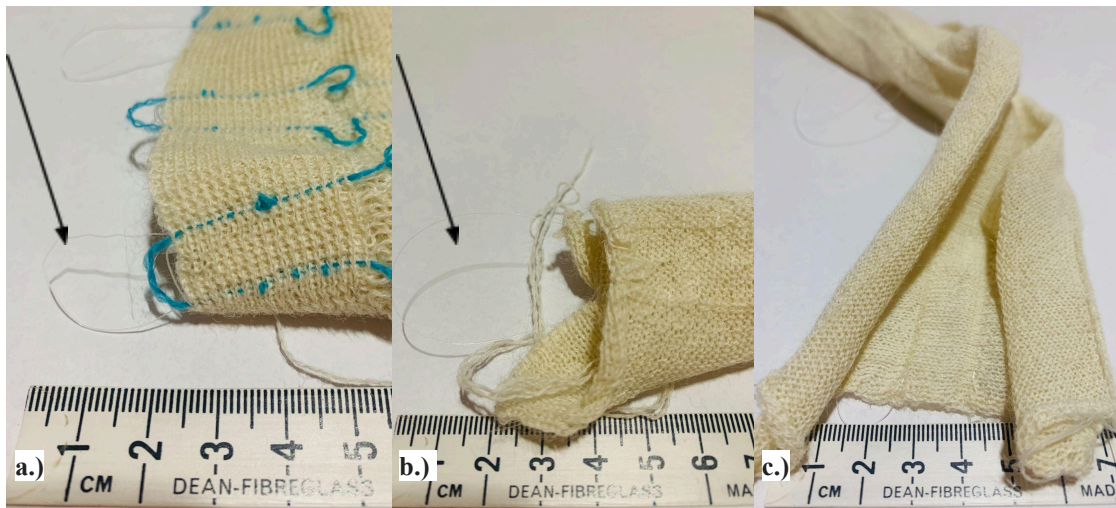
a) Arrow points to kinked and damaged POFs looping out of the side of Sample 2. b.) While arrow points to undamaged POFs loop out at the side Sample 4, a single-bed 1x1 rib sample, the POF was not prevented from sliding laterally within the structure c.) The combination of the single-bed structure and the linear nature of inlay, along with the inlaid POF, caused curling, as seen here in Sample 4.
